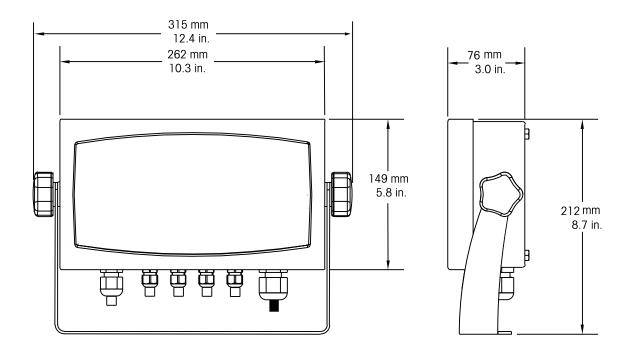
T51XW Indicator Overall Dimensions with Mounting Bracket.
